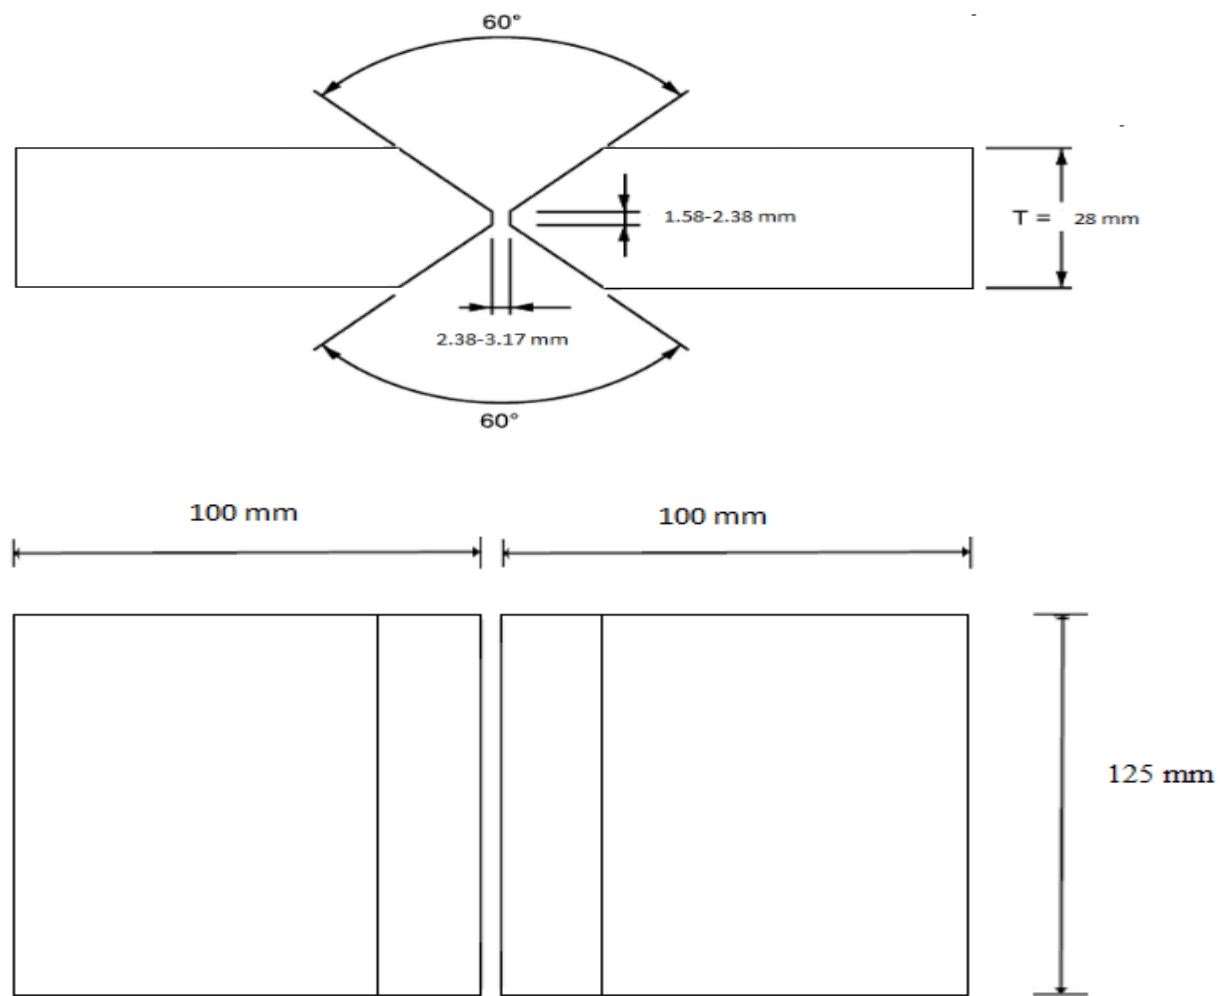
Double-V Groove geometry (a) front view and (b) top view (all dimensions are in mm)
